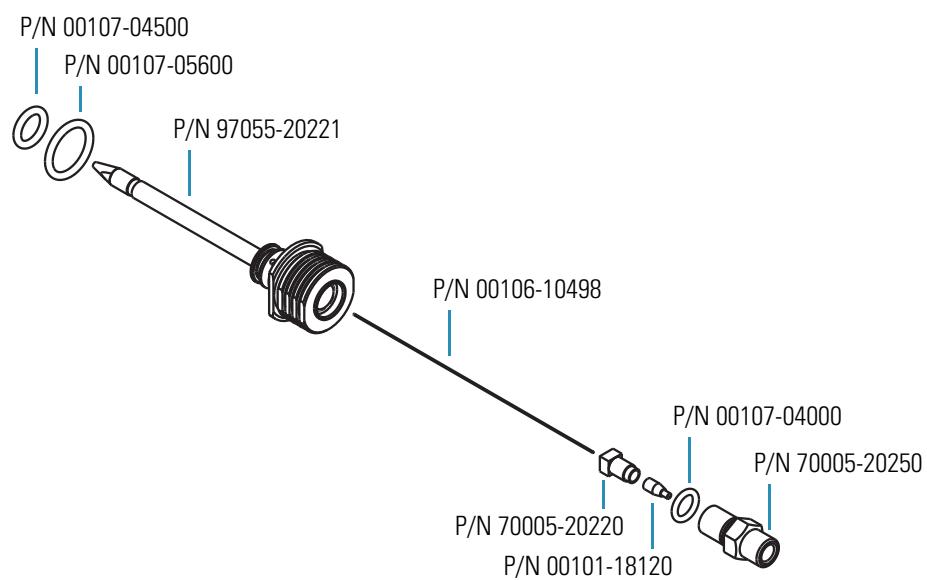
APCI probe nozzle assembly (P/N 97055-60089)
